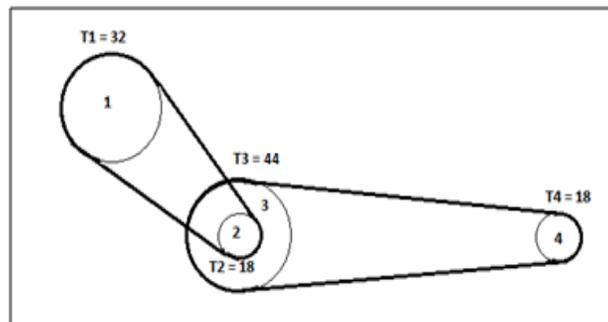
Drive Arrangement with 32T Chain Ring and 18T Rear COG
